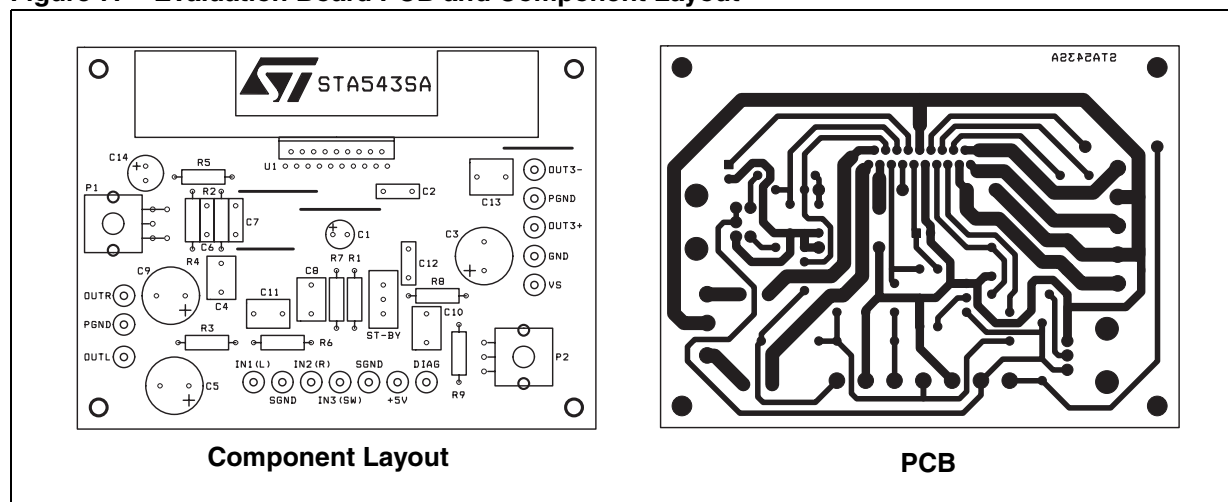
Evaluation Board PCB and Component LayoutTable 7. Part list
